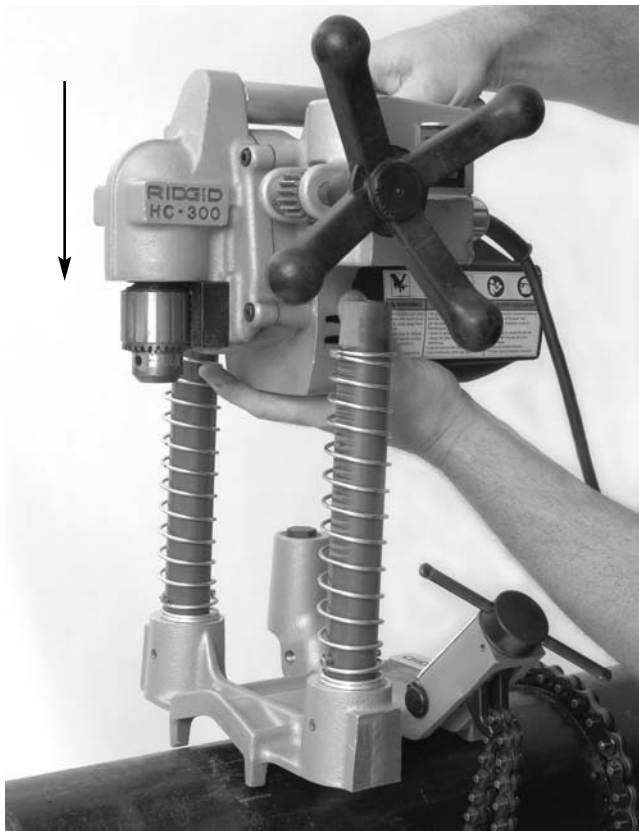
Attaching the HC-300 Motor Assembly to the Base Assembly
